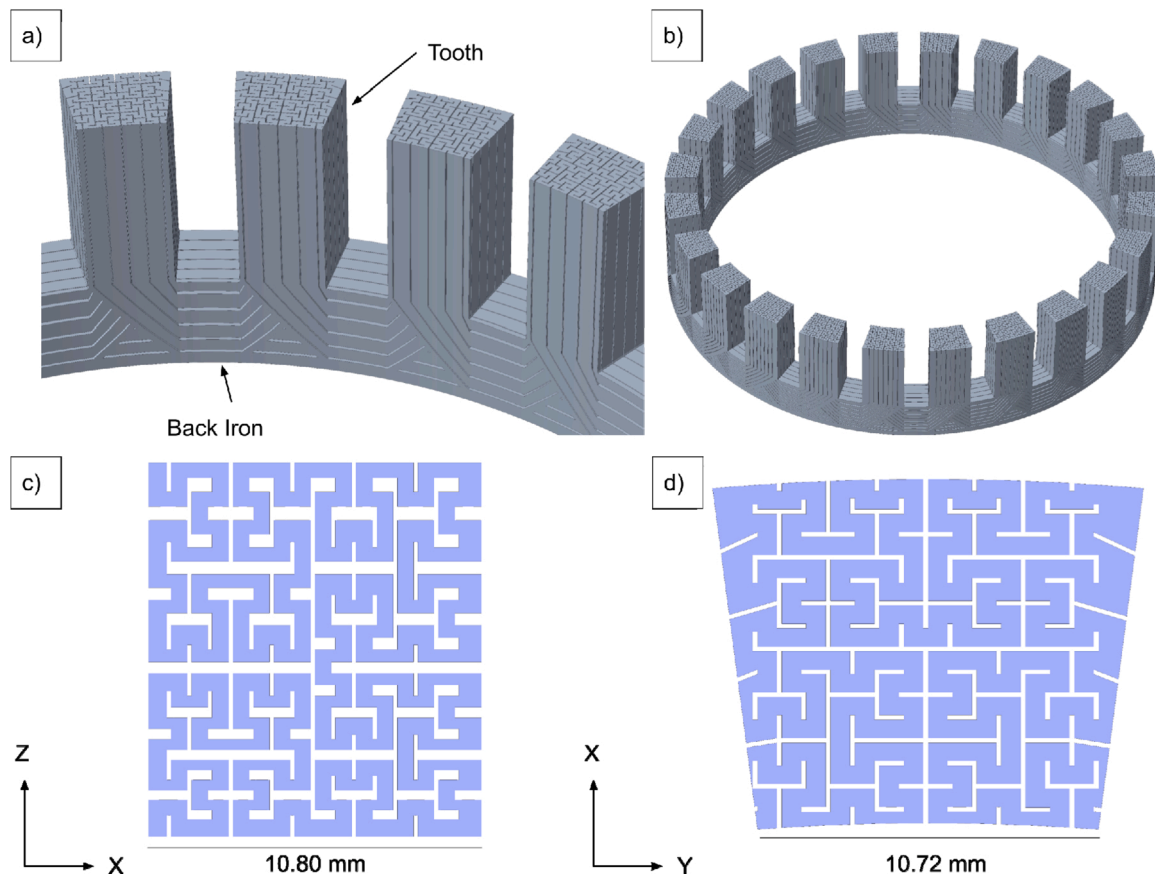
Hilbert stator for AXPM machine designed to be manufactured using AM. The stator has a toothed region which has a uniform air gap size for the XY plane of the AM machine, with a back iron region with non-uniform air gaps showing more clearance in the Z direction than the X direction.
